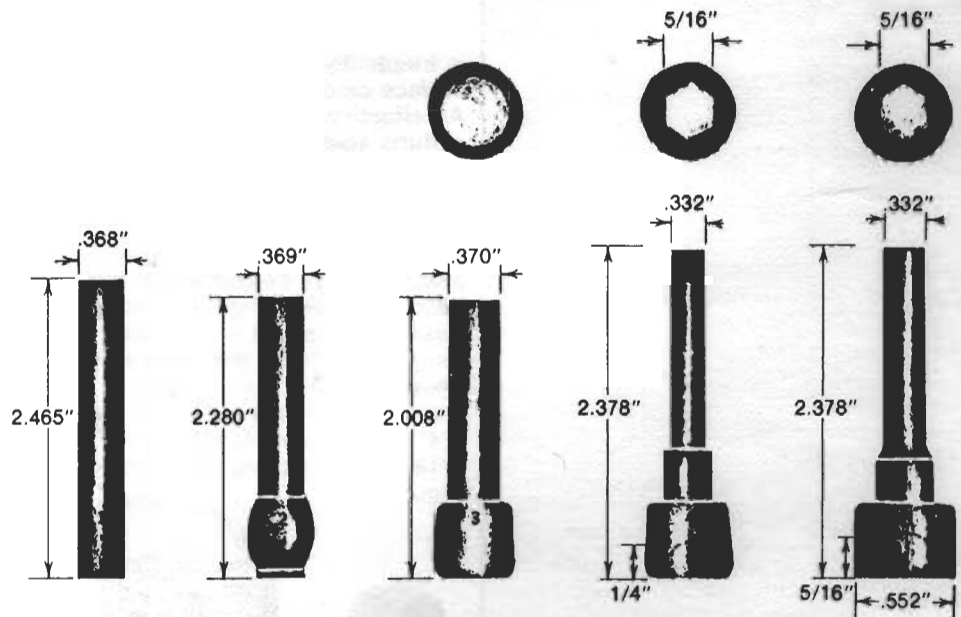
Screw Blanks Made by Cold Heading Annealed 18% Nickel Maraging Steel.
